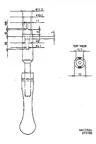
Dimensional drawing of tool for BNC input sockets.
